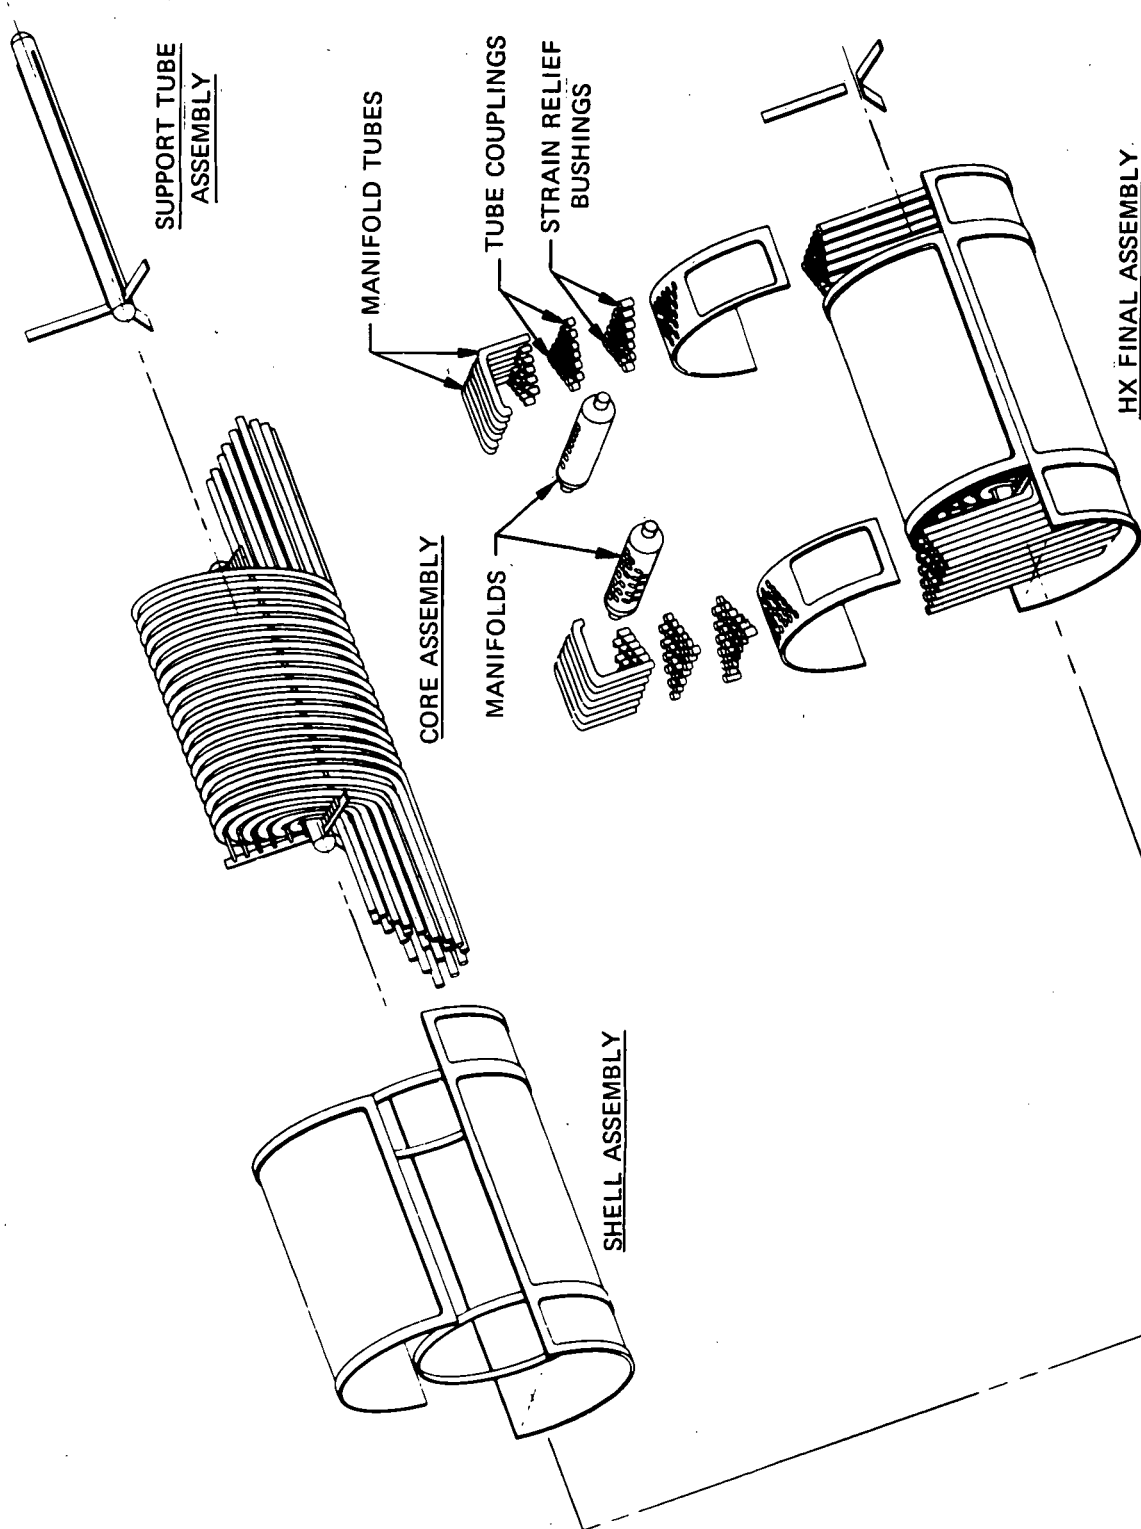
Assembly Sequence, Helical Tube Heat Exchanger
